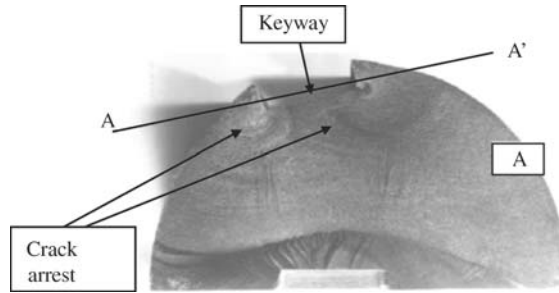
The fracture surfaces were relatively smooth-textured and flat; two sets of concentric crack arrest marks were visible on the fracture surface. (Reprinted with the permission of M. Zamanzadeh, ATCO Associates, Pittsburgh, USA)
